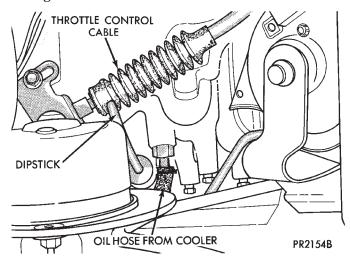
Remove Upper and Lower Oil Cooler Hoses
